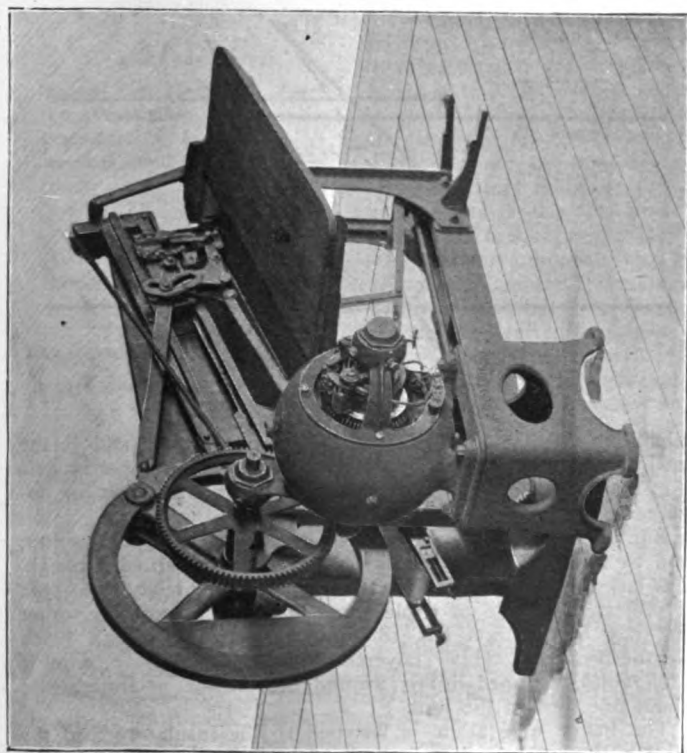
NORTHERN STEEL MOTOR, VARIABLE SPEED ATTACHMENT, DRIVING BAKER STAKING MACHINE.
